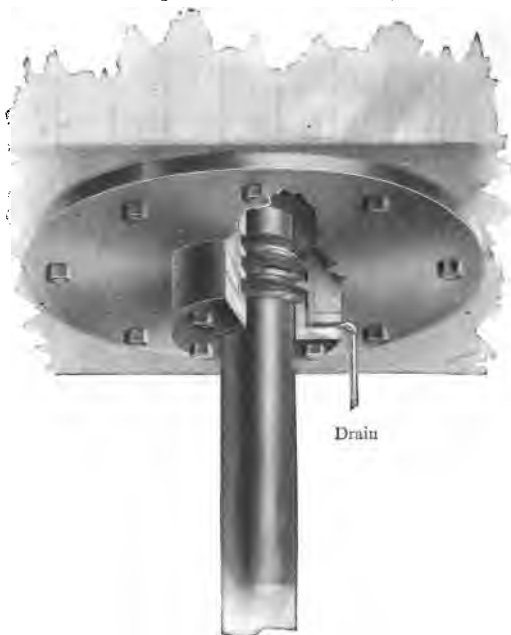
Pitt Marine Metal Packing, Garlock Packing Co.
